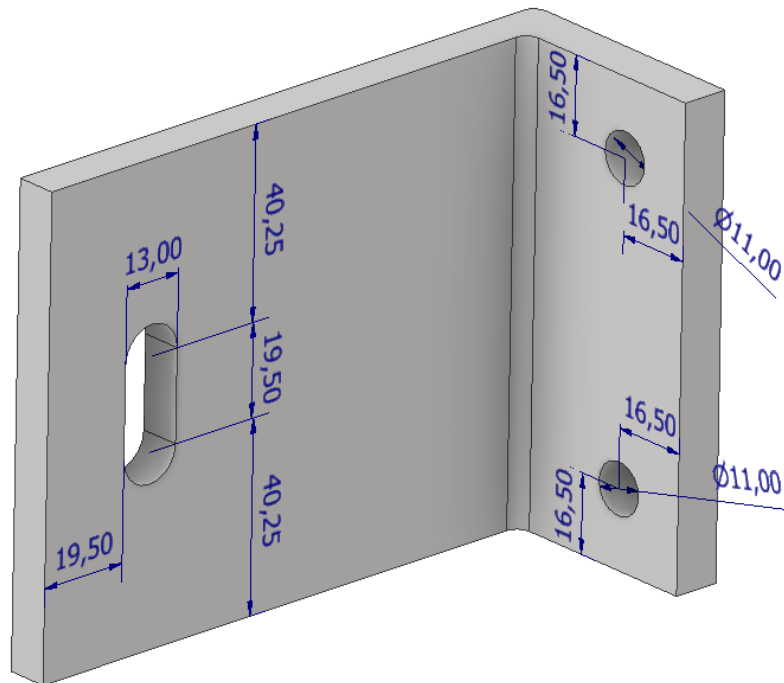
Bolt hole placement and extrusion length for large wind L-profile. Rear bolts are size M10, front bolt is size M12. Dimensions in mm.
